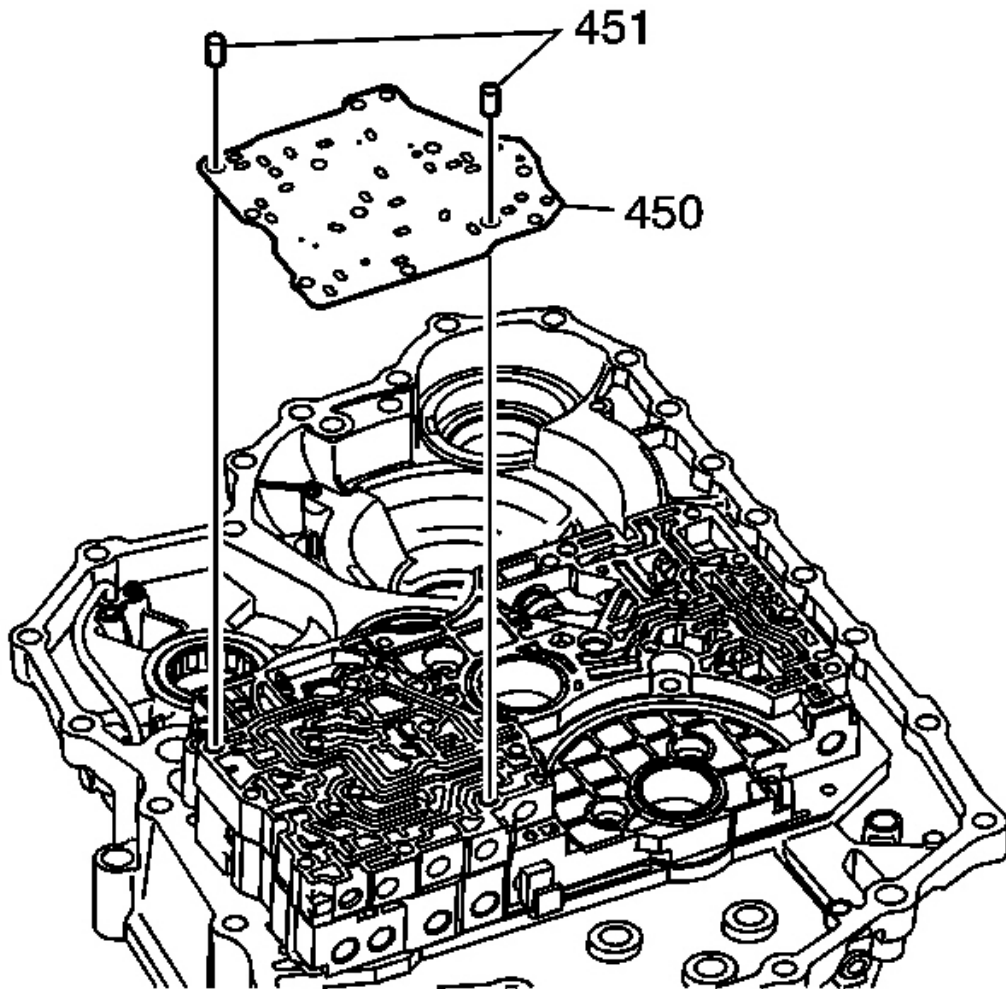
Accumulator Valve Body Spacer Plate & Location Pin
